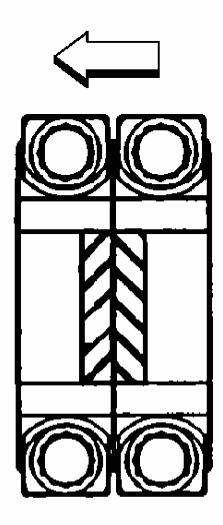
View Of Paired Connecting Rod Bearing Cap Notches Courtesy of GENERAL MOTORS CORP.
